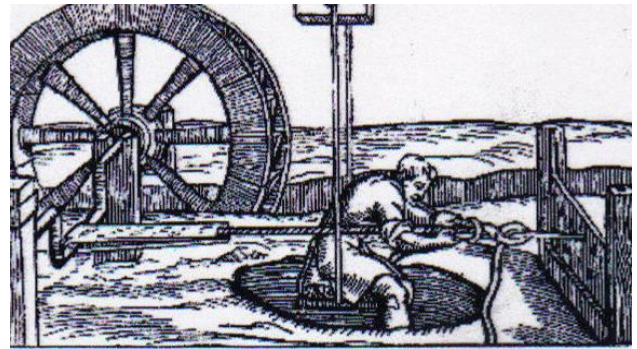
Machine for drawing wires, driven by a wheel turned by ground water
